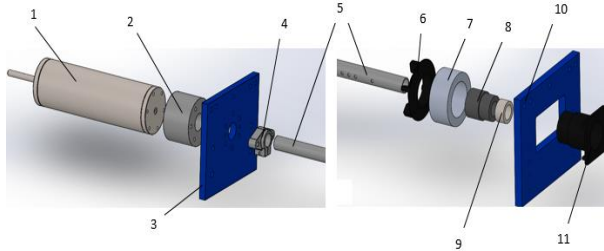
CAD model of the set of mounting parts of the pneumatic gun to the machine: (1) Air tank; (2) Tube holder; (3) Vertical plate; (4) Tube retainer; (5) Tube; (6) Fêmea hydraulic support; (7) Outer ring; (8) Inner ring; (9) Tube ring; (10) Vertical plate with window; (11) Male hydraulic support.
